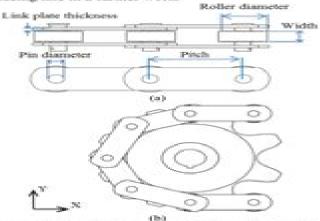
CAD model description of: (a) roller chain and (b) roller chaindrive system
